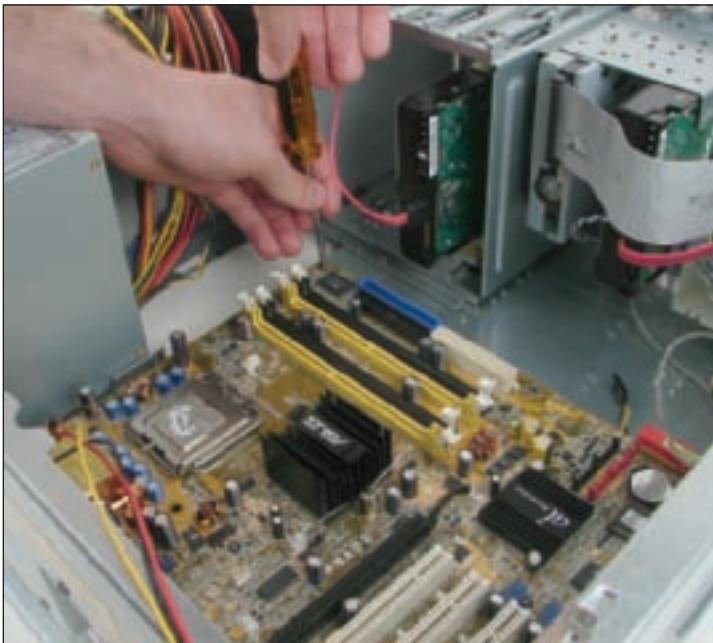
Remove up to nine screws that hold the motherboard to the case
